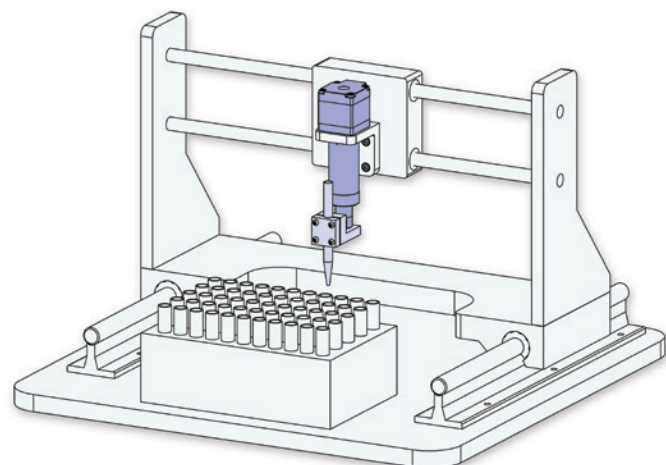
Fluid pump utilizing an MLA as the drive mechanism.
